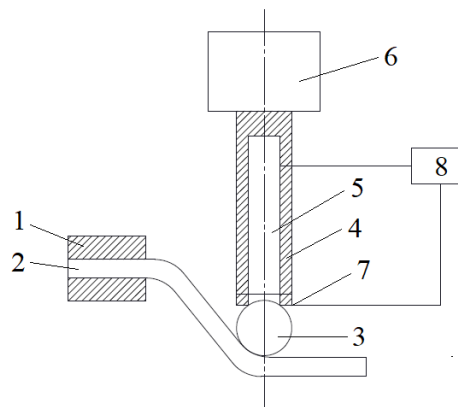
Working principle of single-point tool forming patent US 7,984,635. 1 – sheet material, 2 – clamping system, 3 – forming tool, 4 – heating system, 5 – heat flux, 6 – cooling system, 8 – synchronization controller [27]
